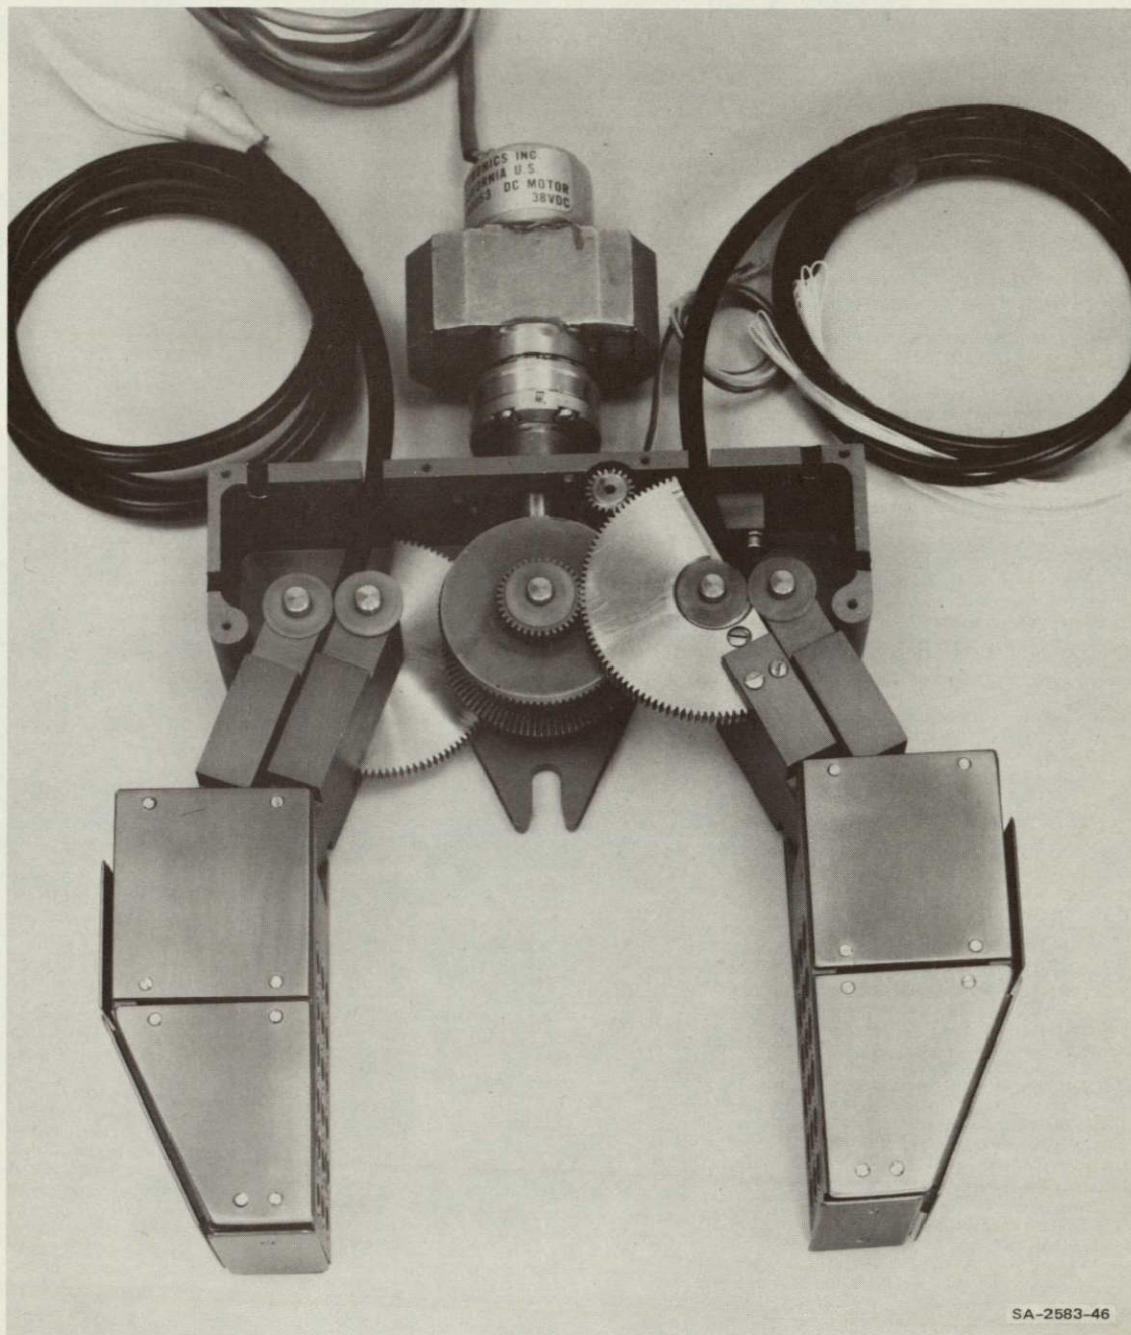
ASSEMBLY OF MOTOR AND DIFFERENTIAL DRIVE MECHANISM
